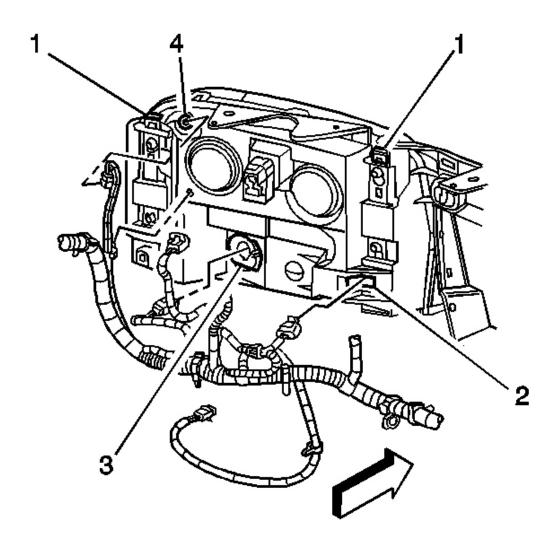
Locating Headlamp Components (TrailBlazer) Courtesy of GENERAL MOTORS CORP.
